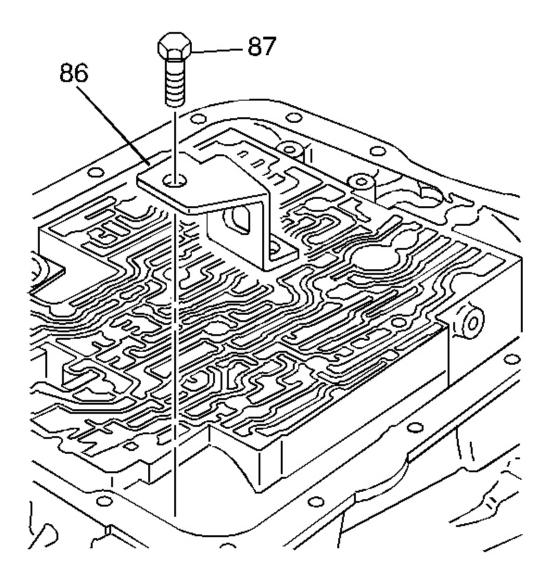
View Of Parking Lock Bracket & Bolt Courtesy of GENERAL MOTORS CORP.
